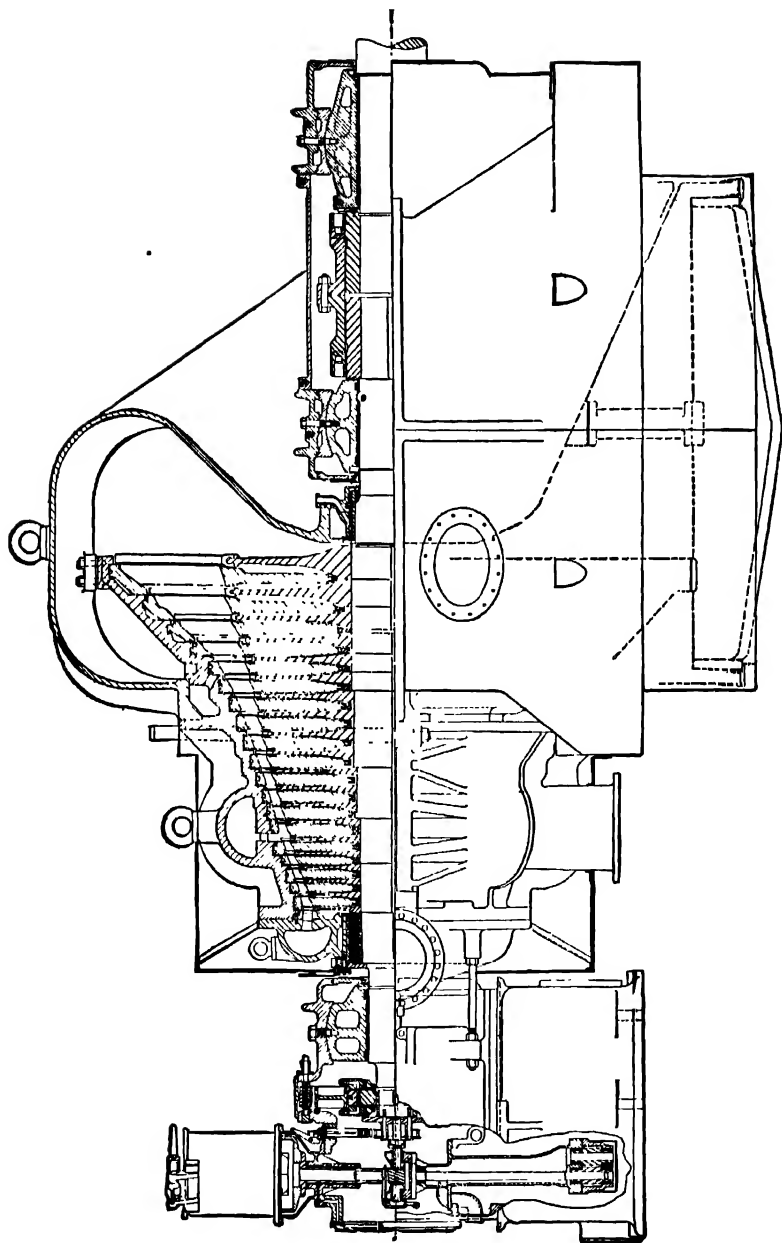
Assembly of 30,000 kw., 1500 R.p.m., 20-stage Curtis Turbine. (Mover's "Steam Turbines")
